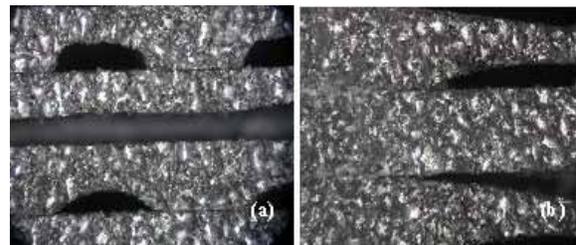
Photographs of (a) cross section and (b) brazed part of assembly of microchanneled aluminum plates by vacuum brazing.
